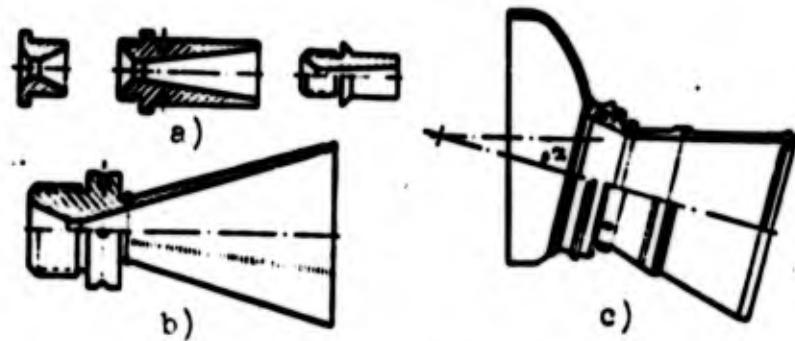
Nozzles of RDTT: a) machined; b) welded conical axisymmetrical; c) welded, set at an angle to the axis of the chamber.
